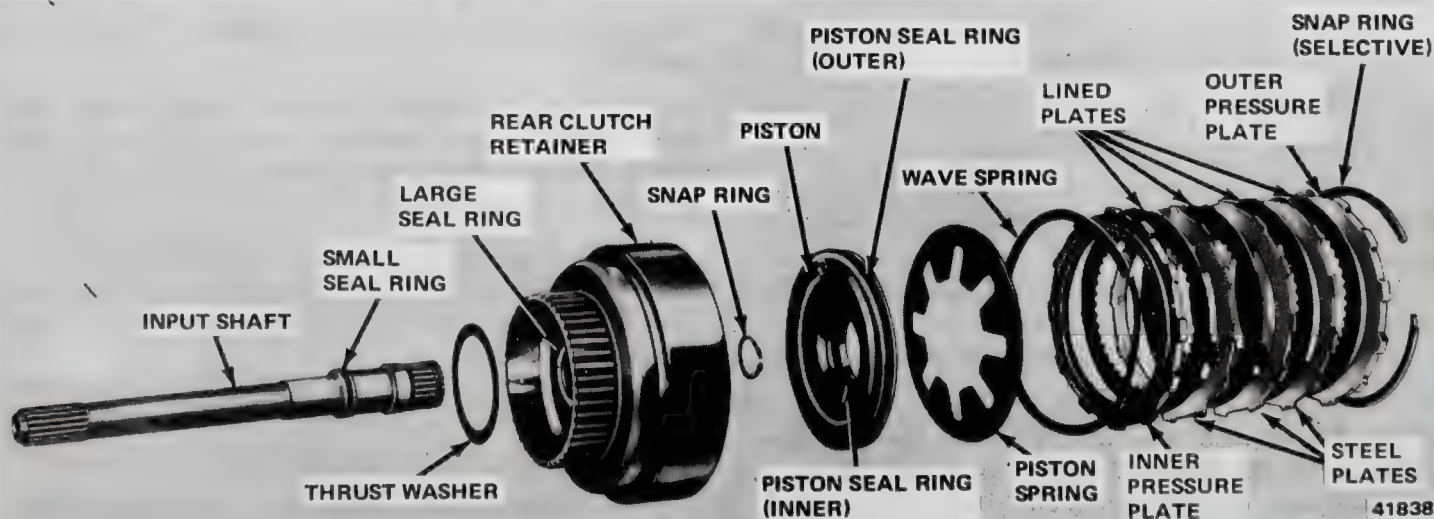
C-82 Rear Clutch Assembly—Models 904-998
